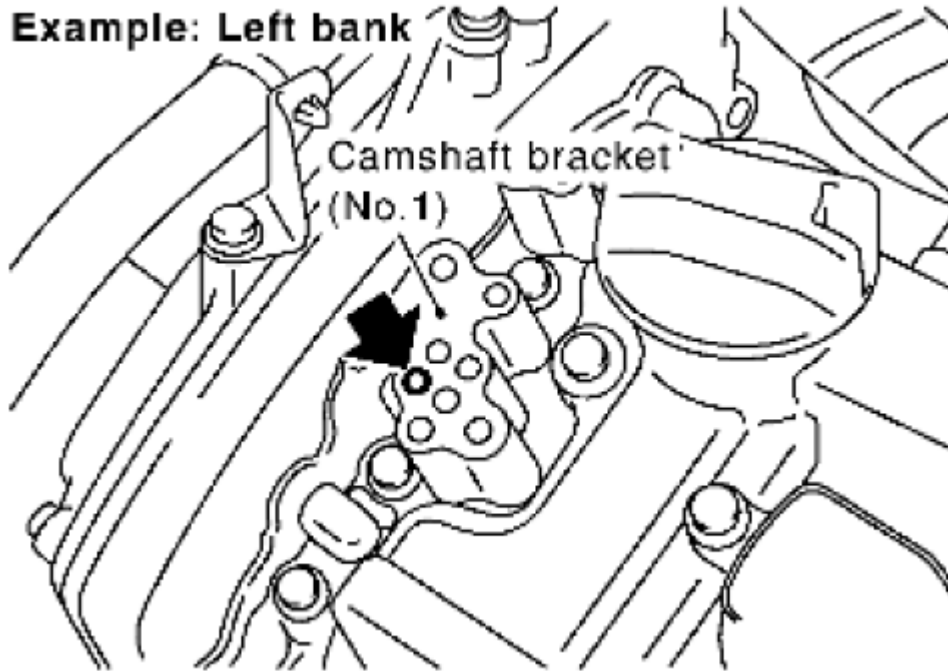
Locating Camshaft Bracket (No. 1) Oil Hole
